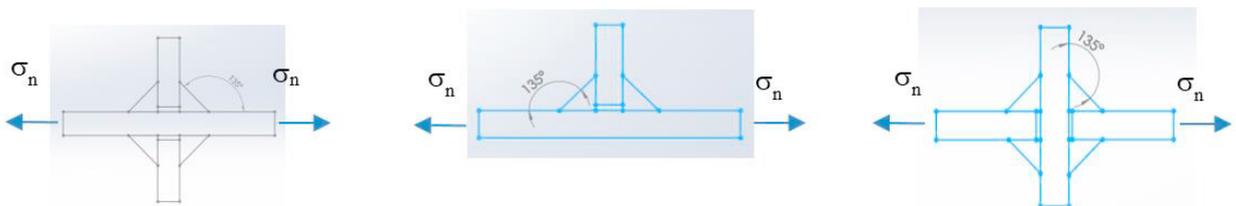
Welded joints in table 1 under remote uniform stress σ_n .
